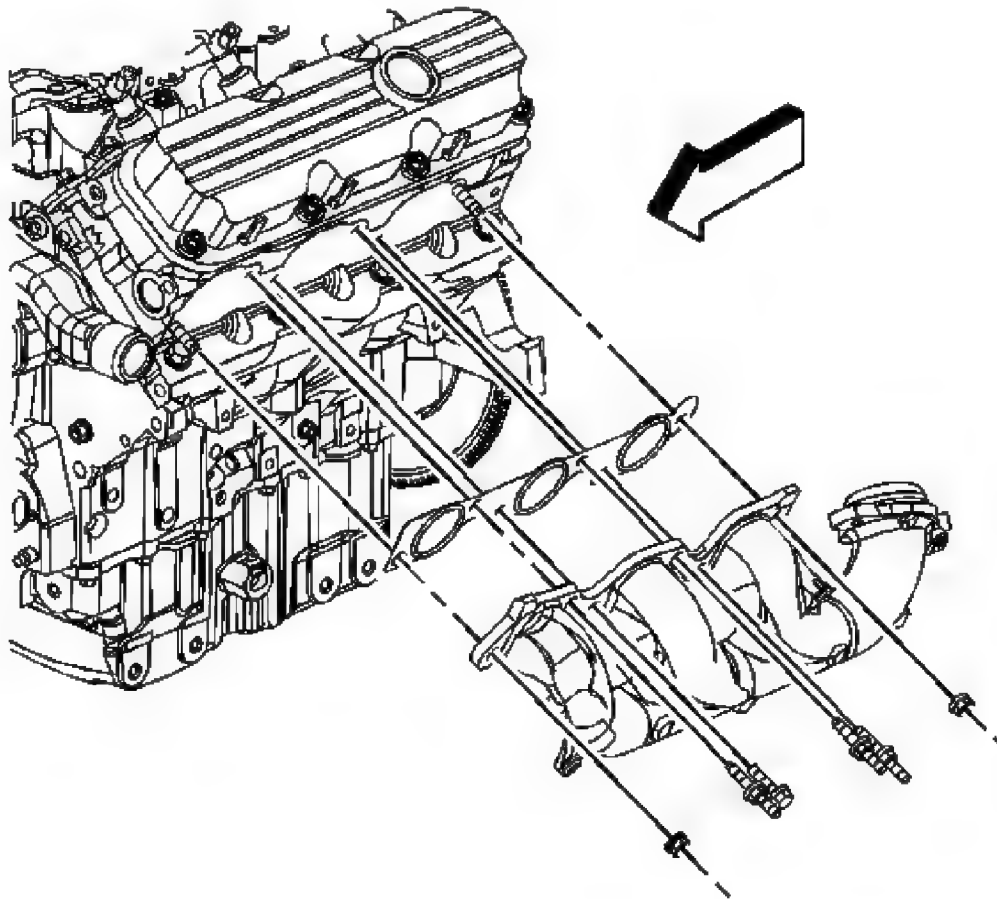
Removing/Installing Left Exhaust Manifold & Gasket
